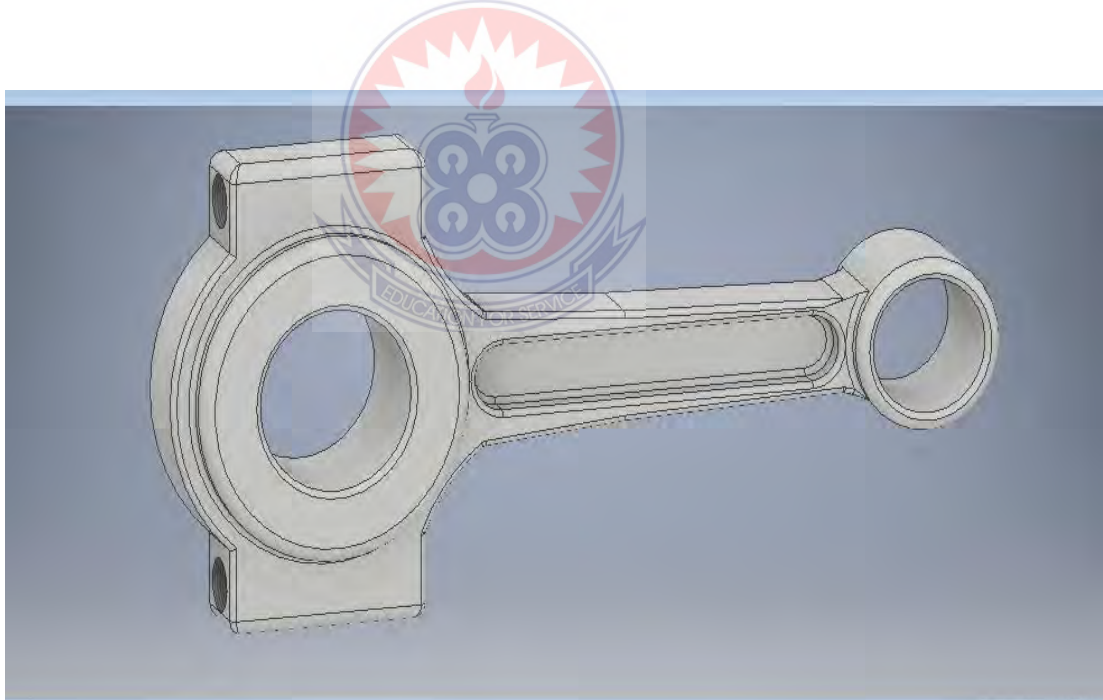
Connecting Rod with the Big End Cap and Bottom End Joined
